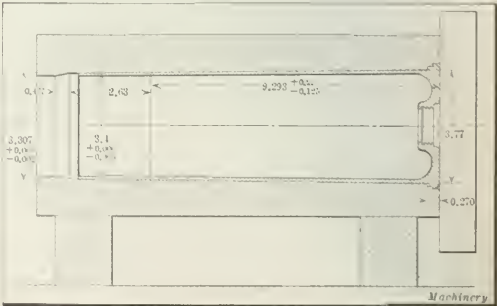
Diagram showing Gage used for Gun Barrel Test
